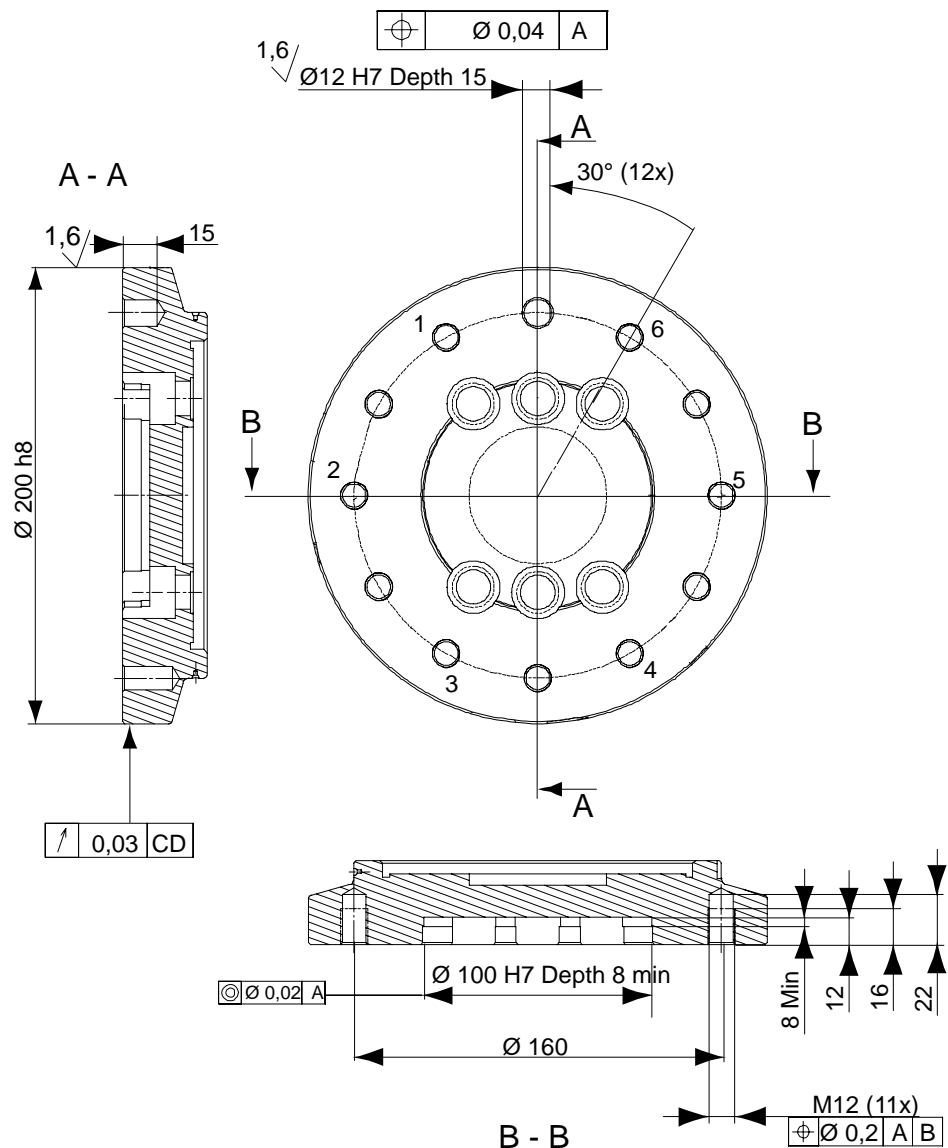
Robot tool flange ISO/DIS 9409-1:2002 (dimensions in mm).
